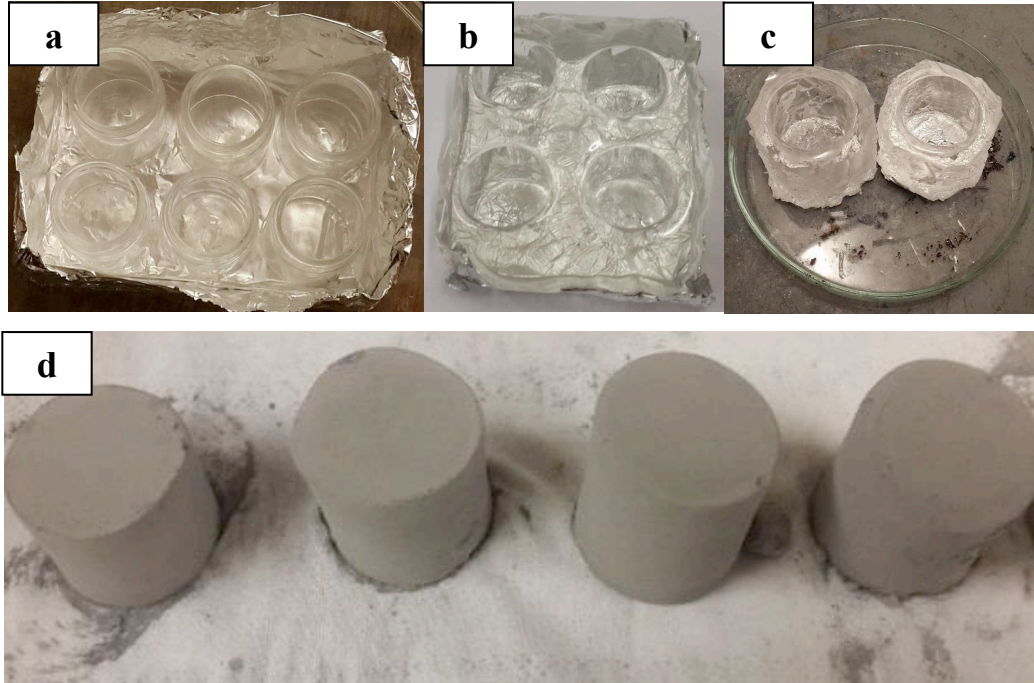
Preparation of the silicon rubber mould (a) the master mould, (b) the mould after casting and de-gassing, (c) samples of the rubber mould, (d) CIPed samples
